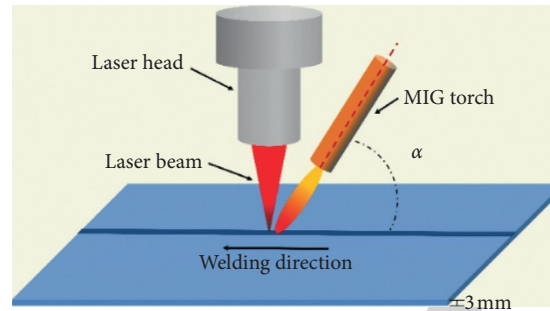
Schematic diagram of laser-MIG hybrid welding of 6061-T6 aluminum alloy.
